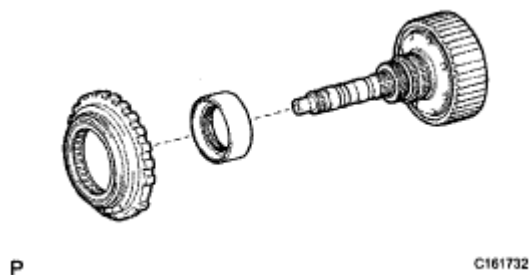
Identifying No. 3 1-Way Clutch Assembly
